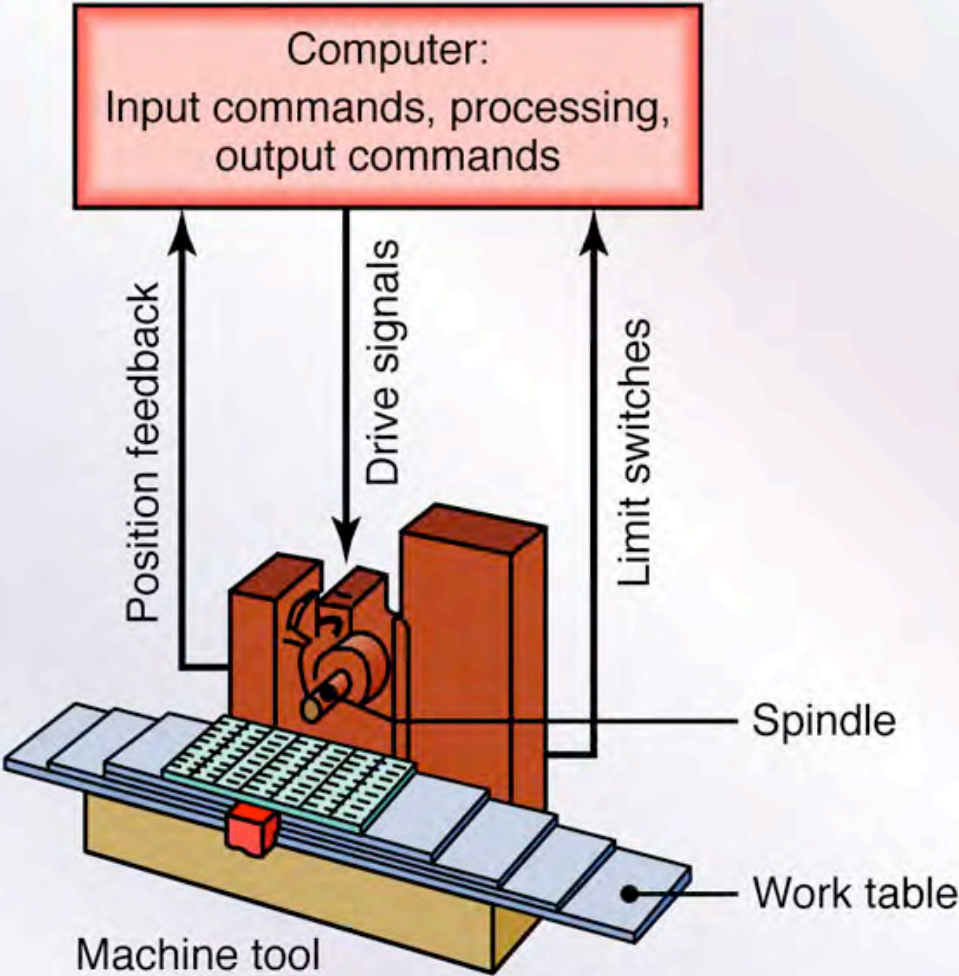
Schematic illustration of the major components of a numerical-control machine tool.
